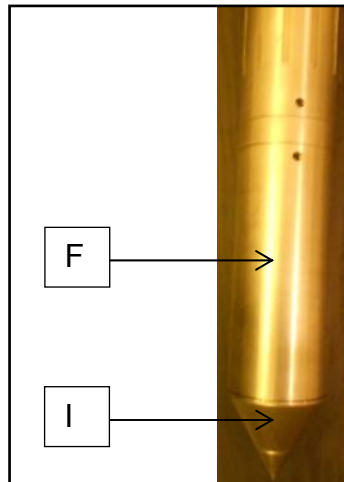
Probe assembly step 8 showing Part F connected to Part I
